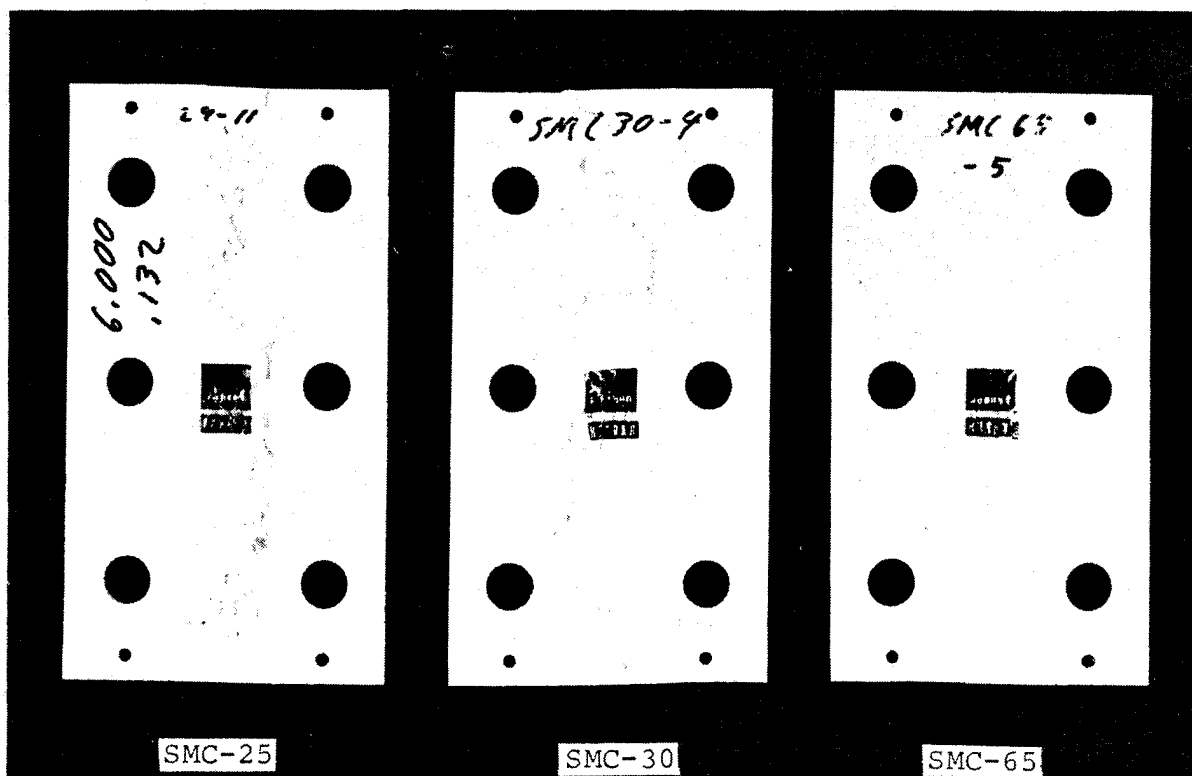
FRACTURED RAIL SHEAR SPECIMENS - SMC-25, SMC-30, SMC-65
